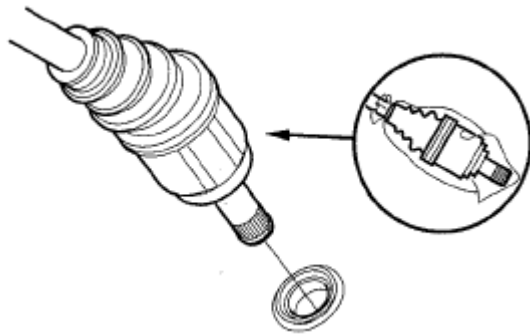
Identifying Driveshaft Ends With Plastic Bags
